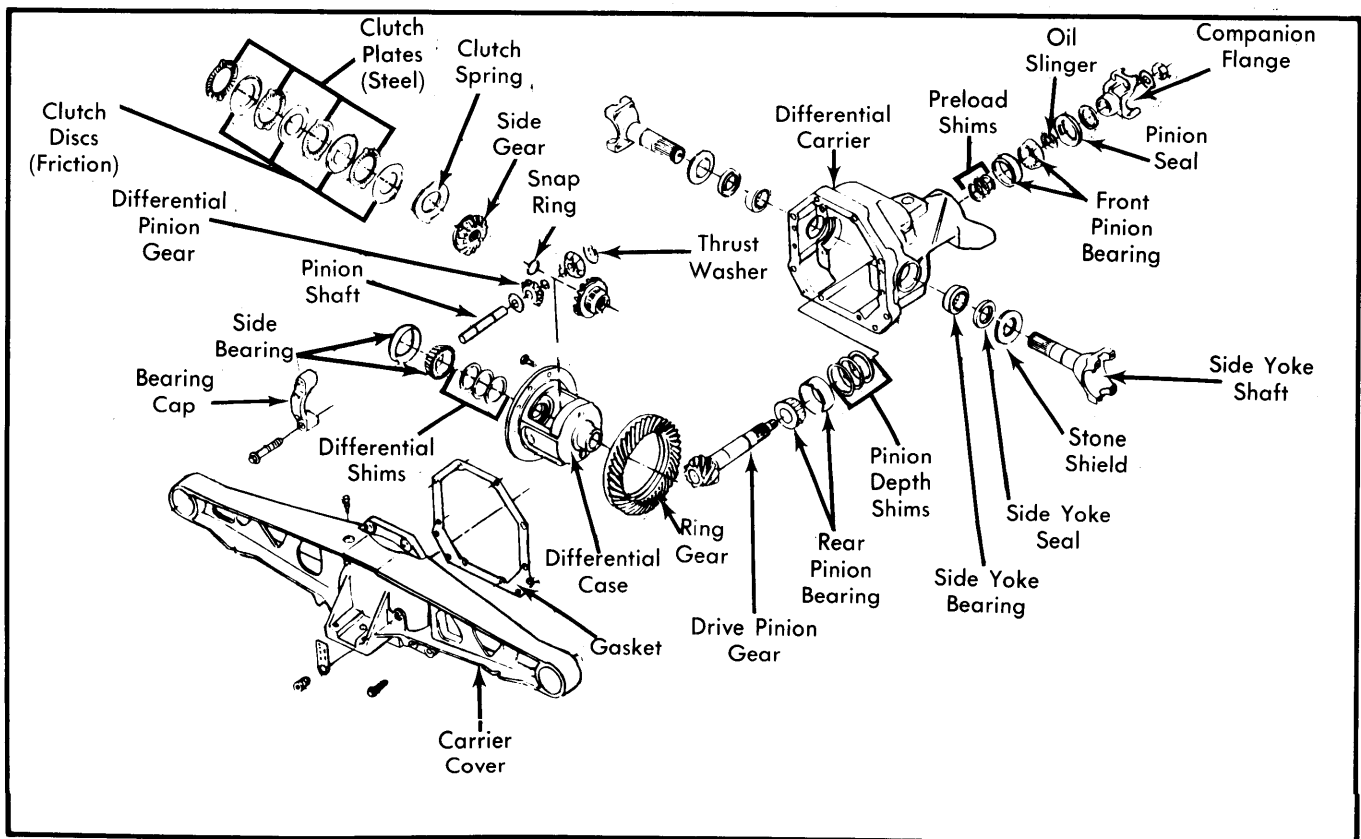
Exploded View of Corvette Rear Axle Showing Location of Shim Packs and Bearings.
